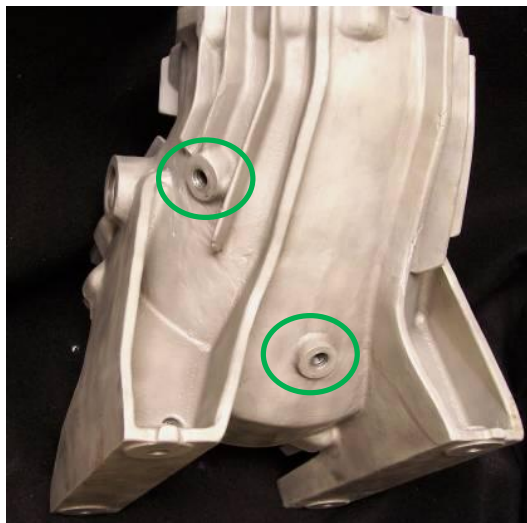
Location of two inserts on backside of H-64 intermediate gearbox.
